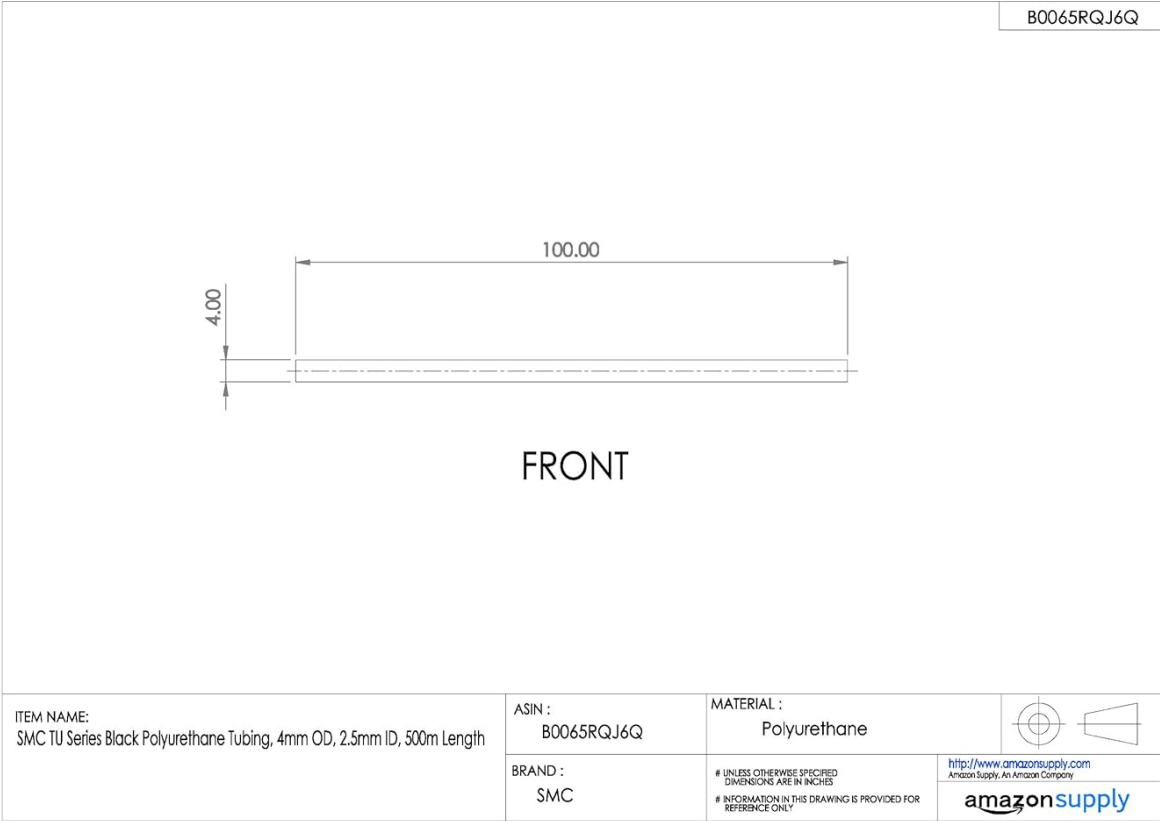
Front view technical drawing of the tubing, indicating key dimensions such as overall length and outer diameter.
